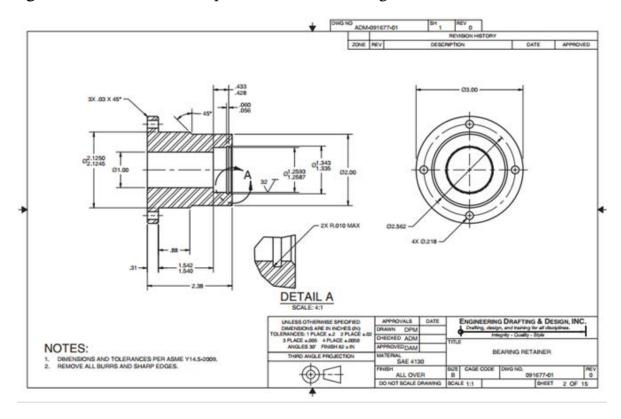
A monodetail drawing has one part per sheet. Dimension values in this Figure are in inches.
